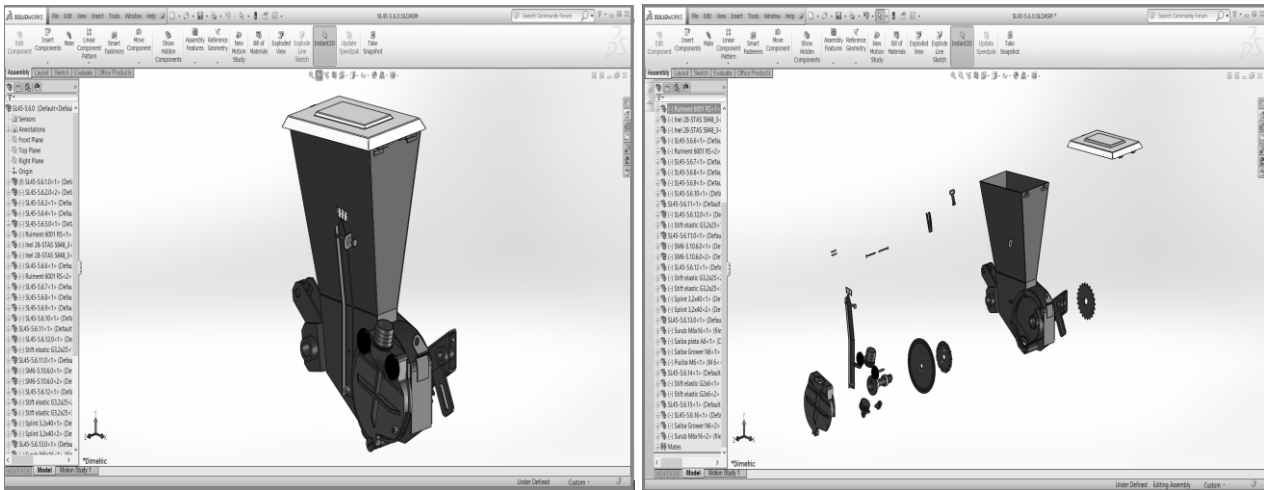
3D geometric model of the distribution device used in pneumatic machines for weeding plant sowing
